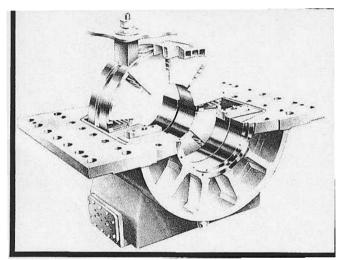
Self-contained thrust bearing showing oil scraper location in upper half casing
